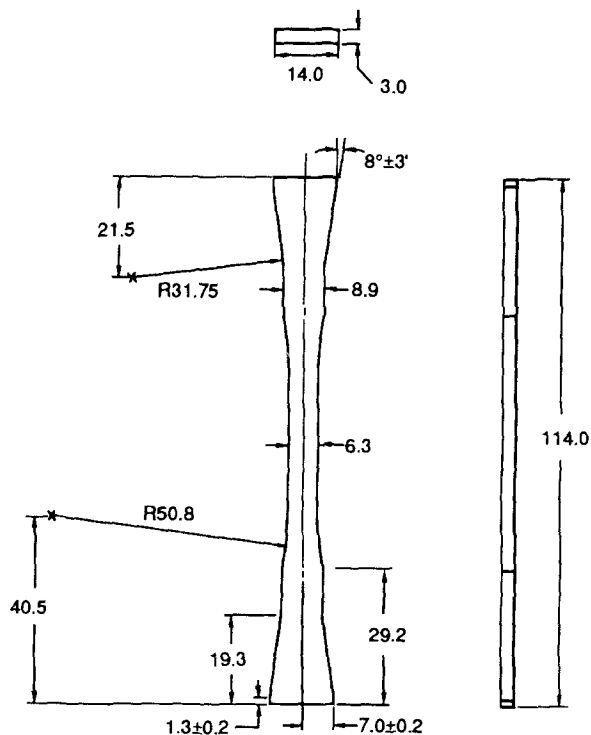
Edge-loaded specimen used to investigate the tensile creep behaviour of HP $\text{SiC}_f\text{-Si}_3\text{N}_4$ composites. Dimensions in millimetres (unless shown otherwise, the tolerance on all dimensions was 0.1 mm).
